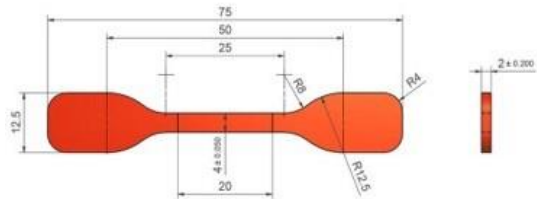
Mini-dogbone shaped DIN 53504 with dimensions in mm for tensile testing.
